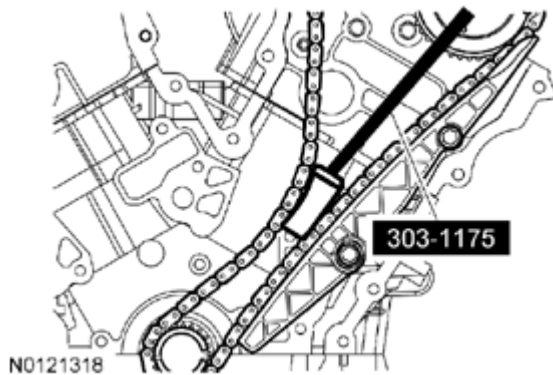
Identifying Timing Chain Locking Tool In LH Timing Chain
